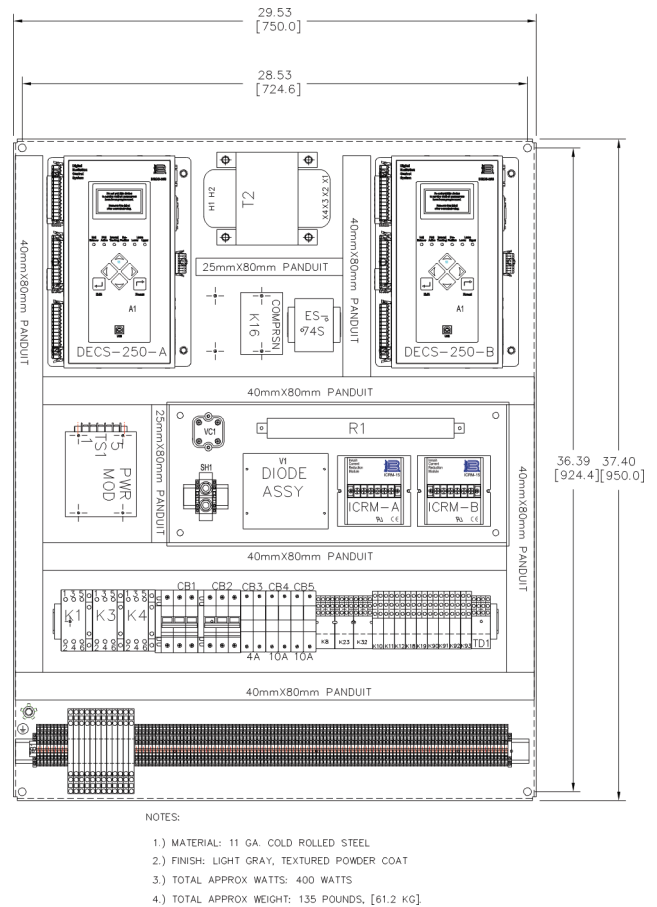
Outline drawing of a redundant SGC-250, a retrofit solution that features redundant regulators and control relays mounted on a pan chassis capable of being installed in an existing enclosure.
